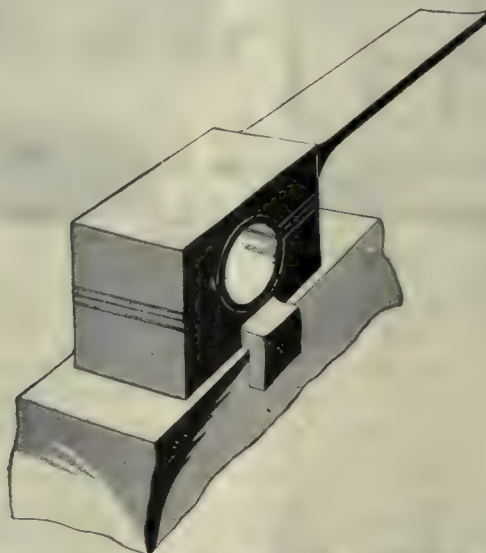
EARLY FORM OF SWAGE WITH LUGS FOR HOLDING ON HAMMER DIE
